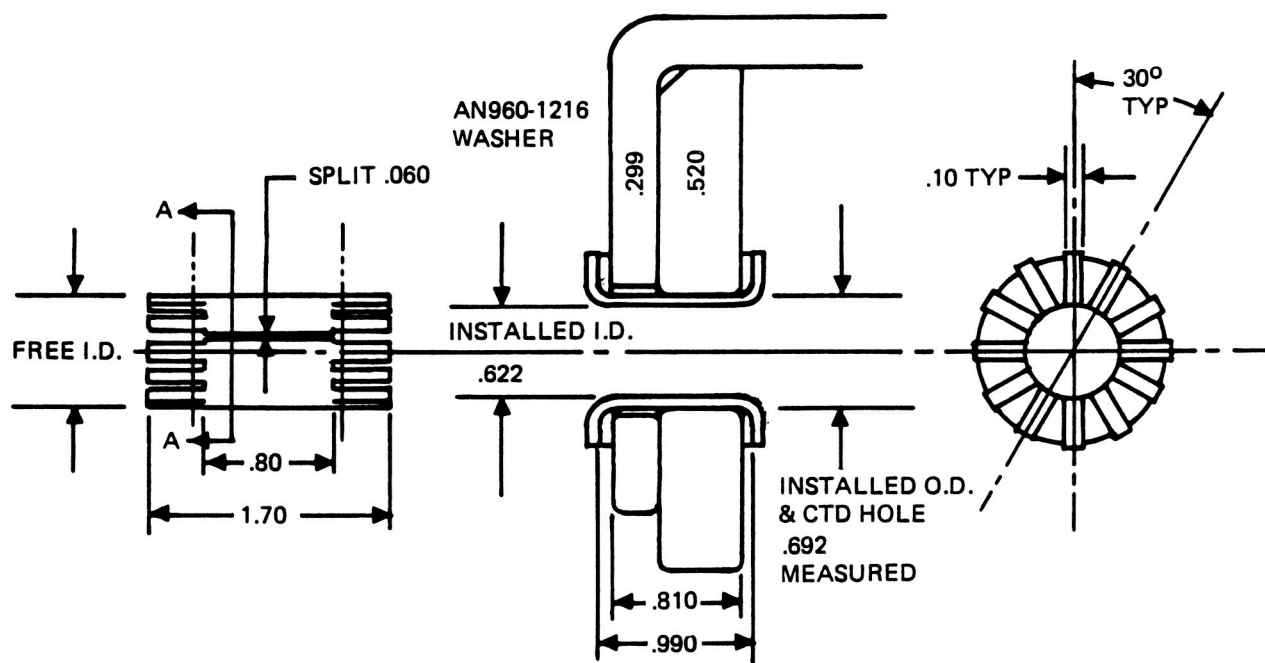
BUSHING DETAILS ACOUSTIC TEST LEADING EDGE
